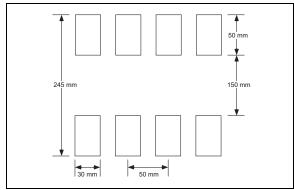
Minimum Recommended 8-Lead SOIC PCB Pads Size.
